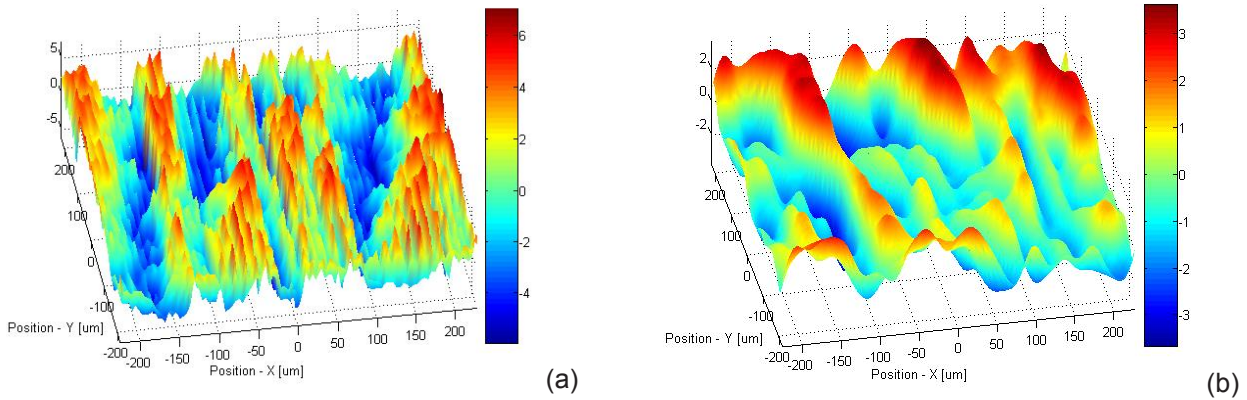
(a) 3-D view of diamond grind (100 grit) surface (b) 3-D view of LAM surface.
